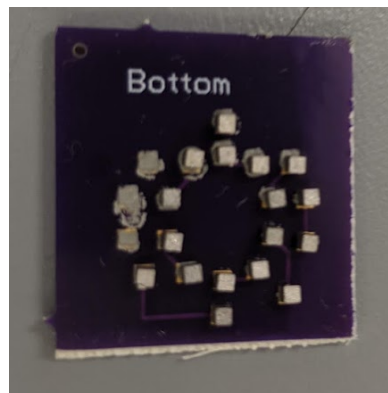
Open-Face of TEG with Thermoelectric Elements on PCB
